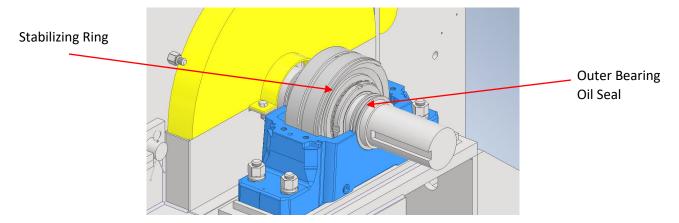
Stabilizing Ring & Outer Oil Seal
